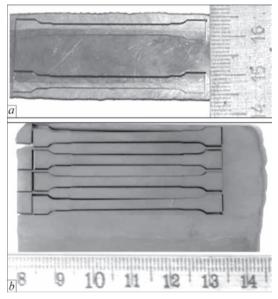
Appearance of initial welded billets with scheme of sample cutting for high-temperature mechanical tests: a - 50 % ZhS6U (BM) + 50 % ZhS6K (DM); b -ZhS6K (DM)
